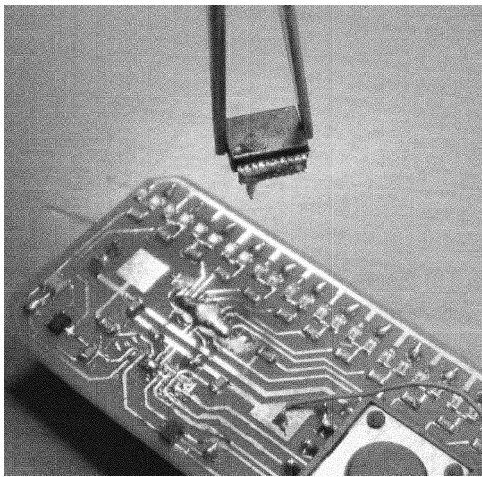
When all the solder is molten at the same time, gravity will separate the chip from the board.
